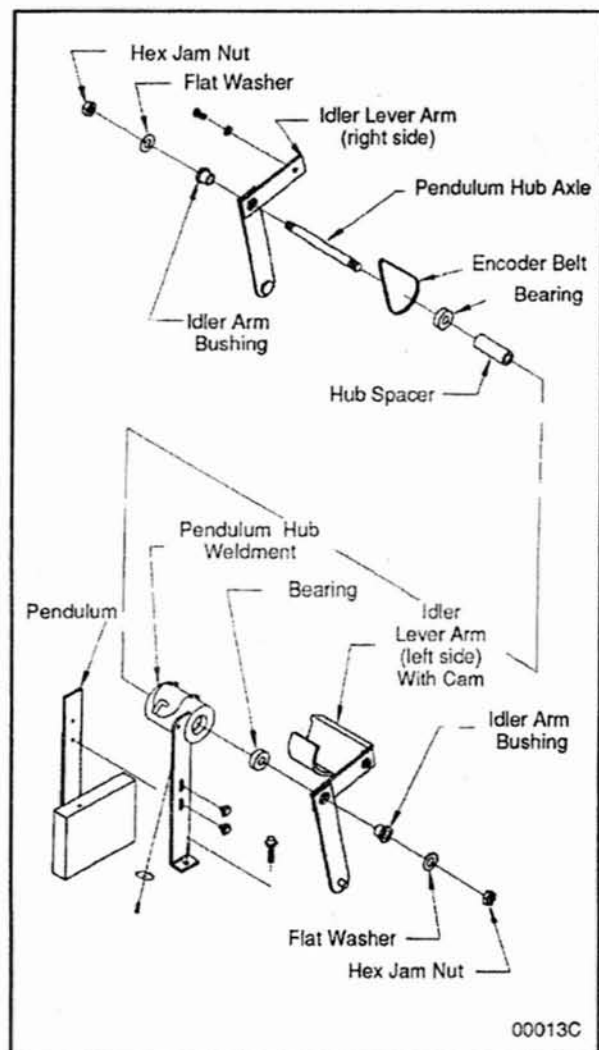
Pendulum Hub & Idler Lever Arm Bearing.
